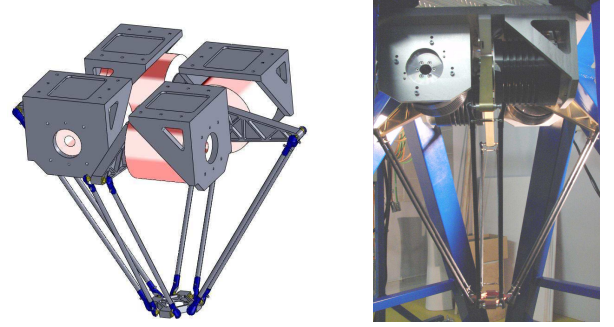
The R4 parallel manipulator: Schematic view of the CAD design (left), side view of the robot prototype (right)
